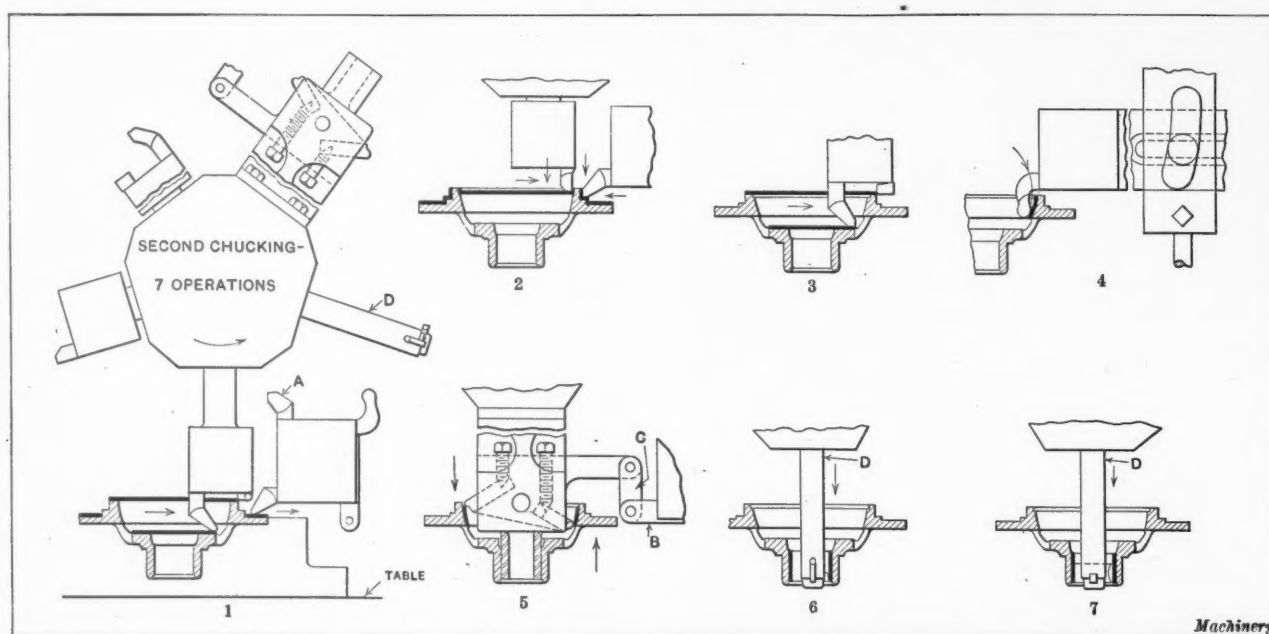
Lay-out of Operations and Tooling used in Second Chucking for machining Differential-gear Case
